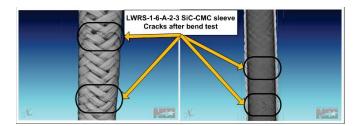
Post bend test 3D tomography results of the 5 cycle, 2-ply (LWRS-1-6-A-2-3) SiC-CMC sleeve specimen showing two sets of cracks.
